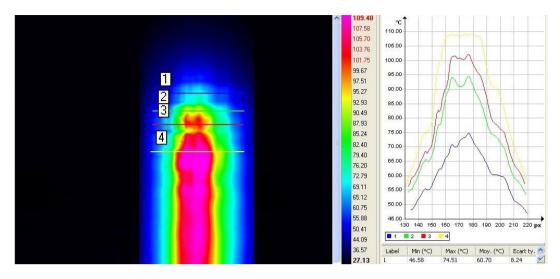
Typical temperature profile for laser weld @  $\lambda = 940$  nm in 2-layer/90° GF plate
